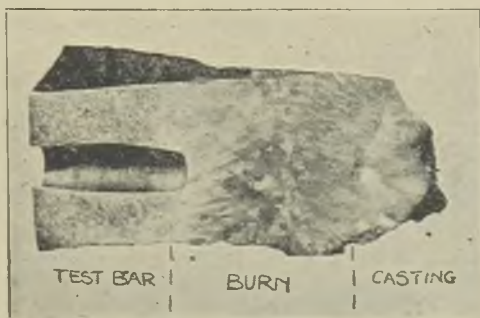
MACROGRAPH (FULL SIZE) RUNNER TO TEST BAR OF LARGE BRONZE CASTING.
